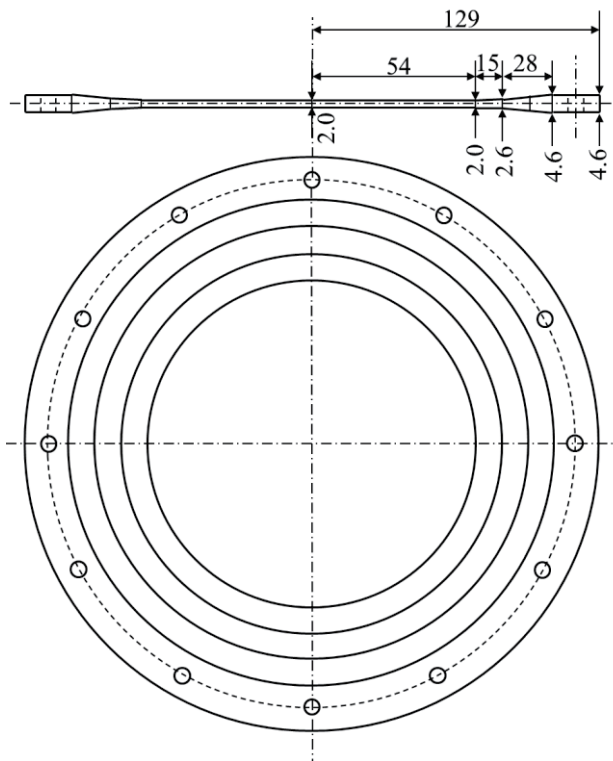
Geometries of test specimen in membranous pressure fatigue test.
